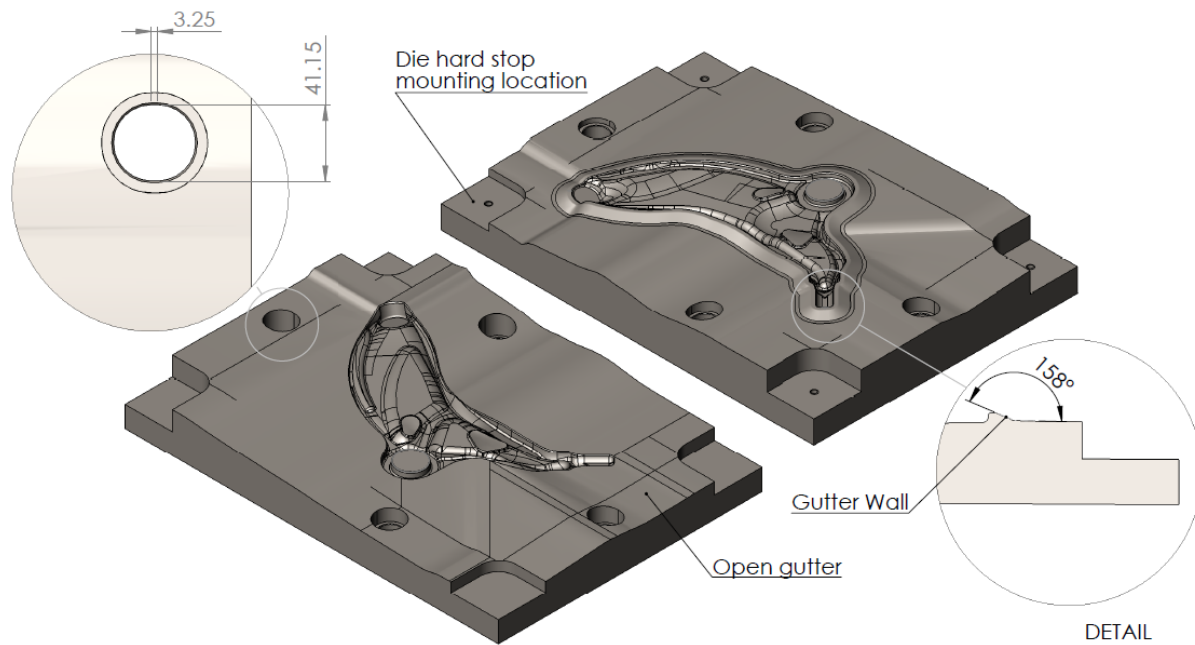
(Left) Upper Forming Tool. (Right) Lower Forming Tool.
